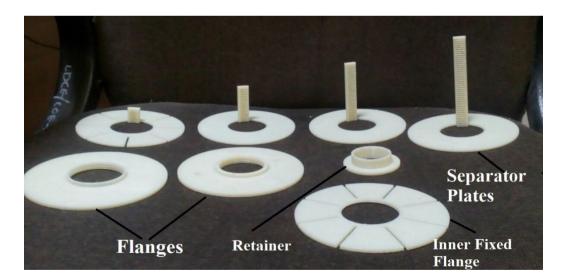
Flanges, Inner fixed flange, Retainer and Separator Plates
